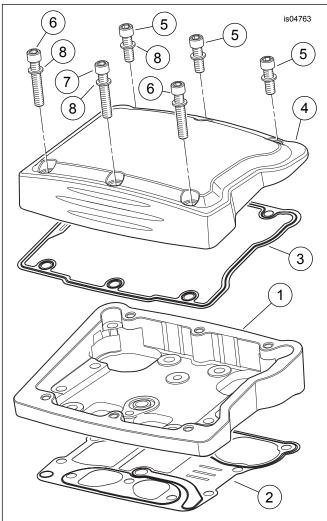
Service Parts, Forged Billet Rocker Box Cover
